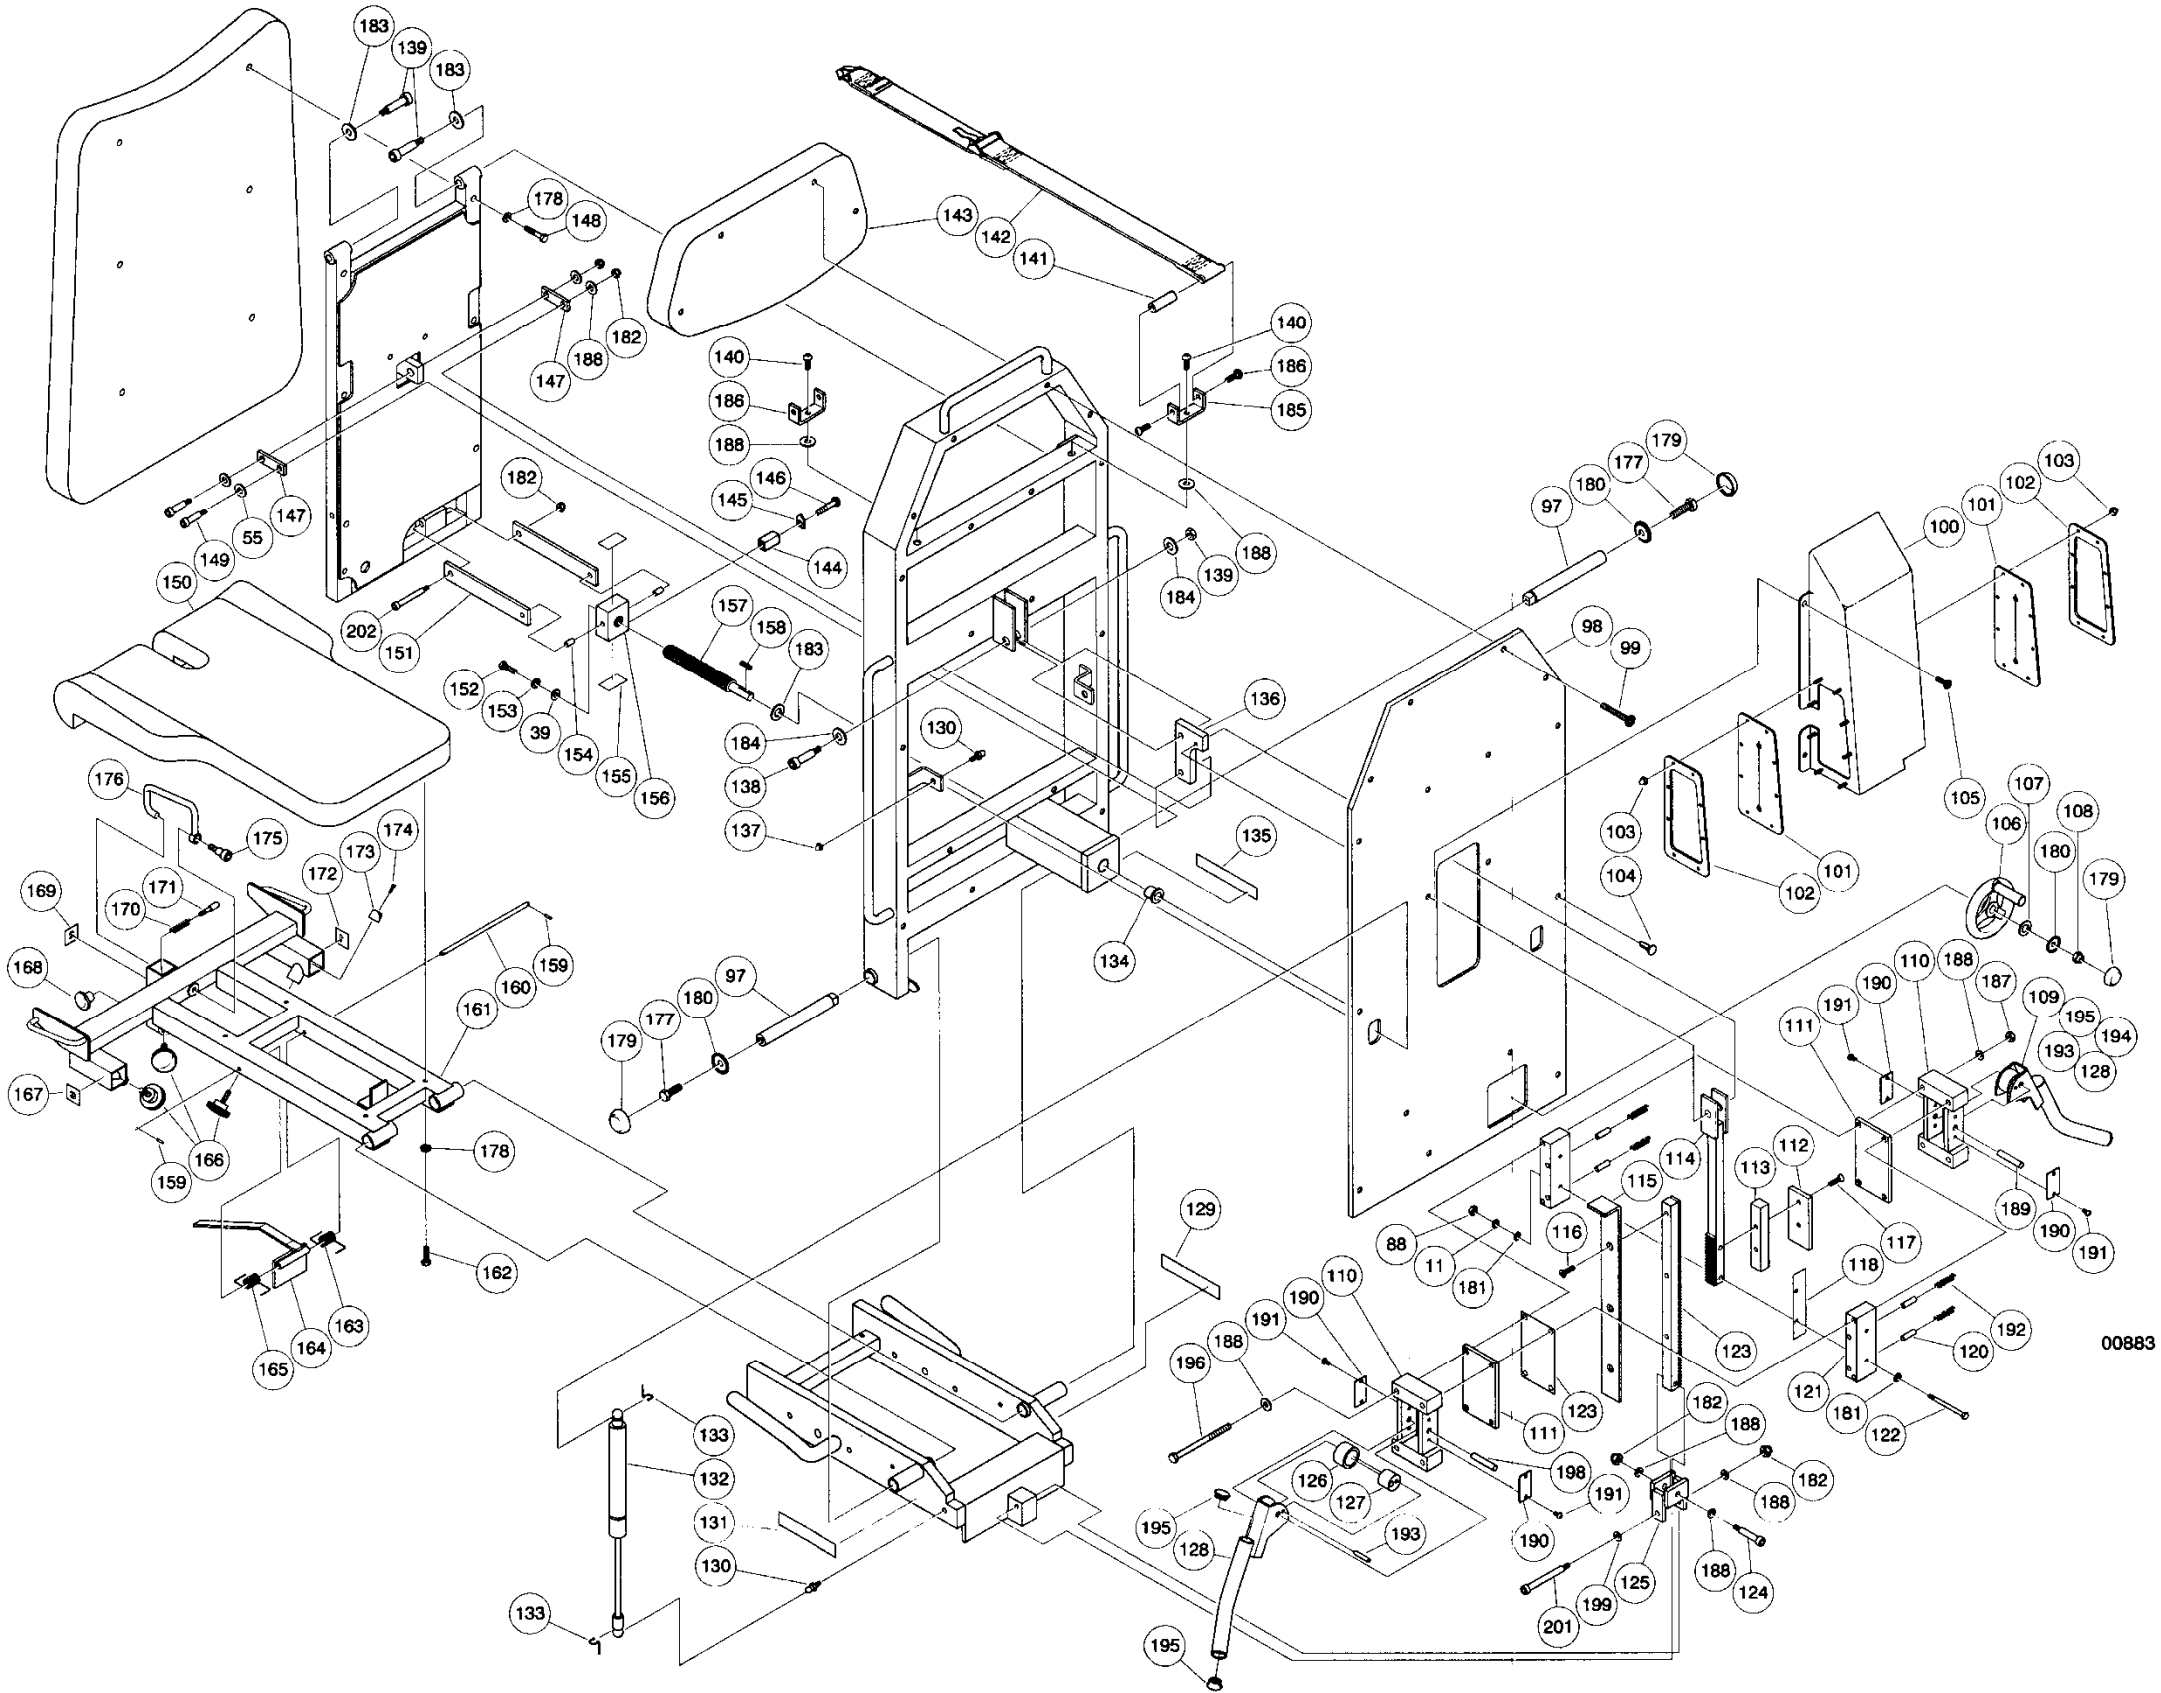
Patient Positioning Module Exploded View (Sheet 1)
